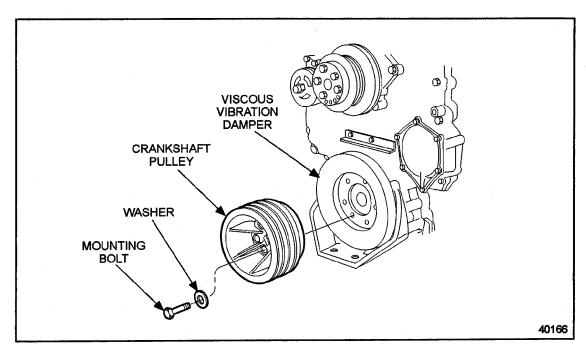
Crankshaft Pulley Mounted Directly to the Crankshaft
